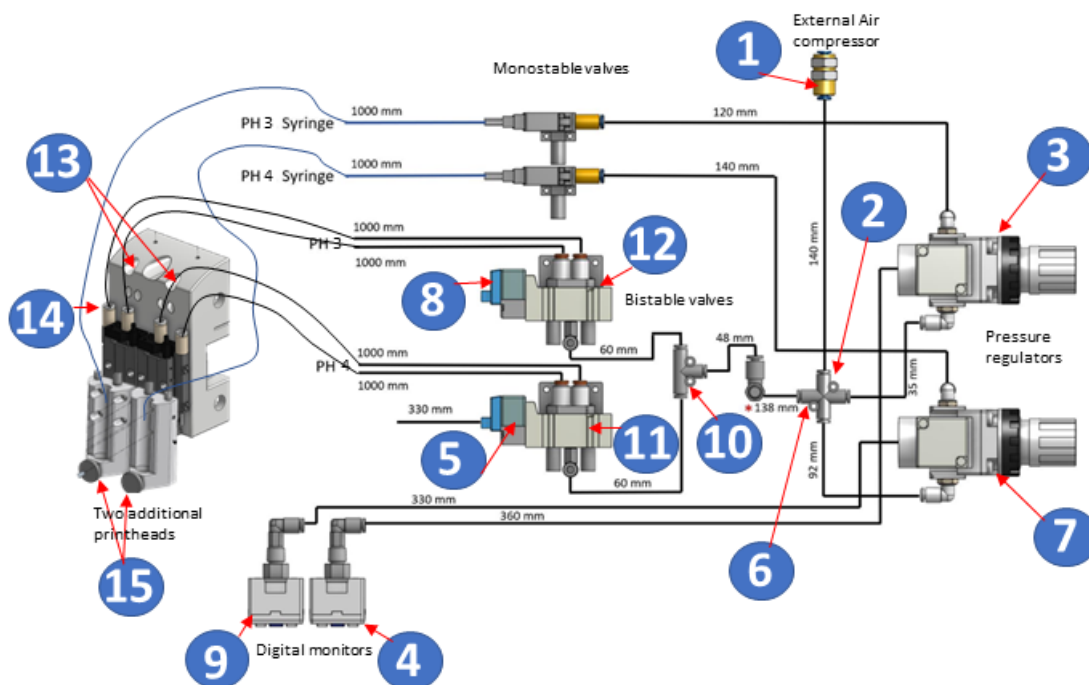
The assembly of machine parts and components incorporated into the commercial 3D bioprinter (Inkredible +) to operate with four printheads simultaneously. Briefly, two additional printheads (15) were incorporated by assembling pressure regulators (3 and 7), pressure sensor coupled with digital monitors (4 and 9), monostable valves (5 and 8), and bistable valves (11 and 12), all connected with plastic hollow tubing that allowed the flow of pressurized air coming from an external air compressor (1) (Original Work).
